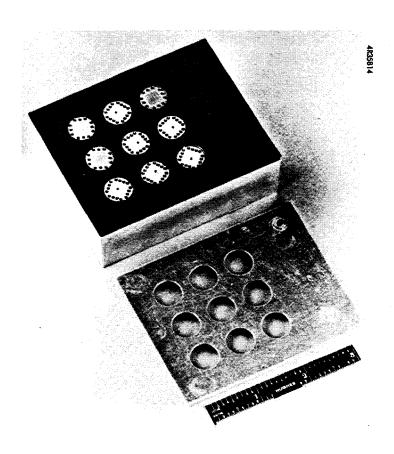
TO type masking tooling, partially assembled with typical parts in place.
